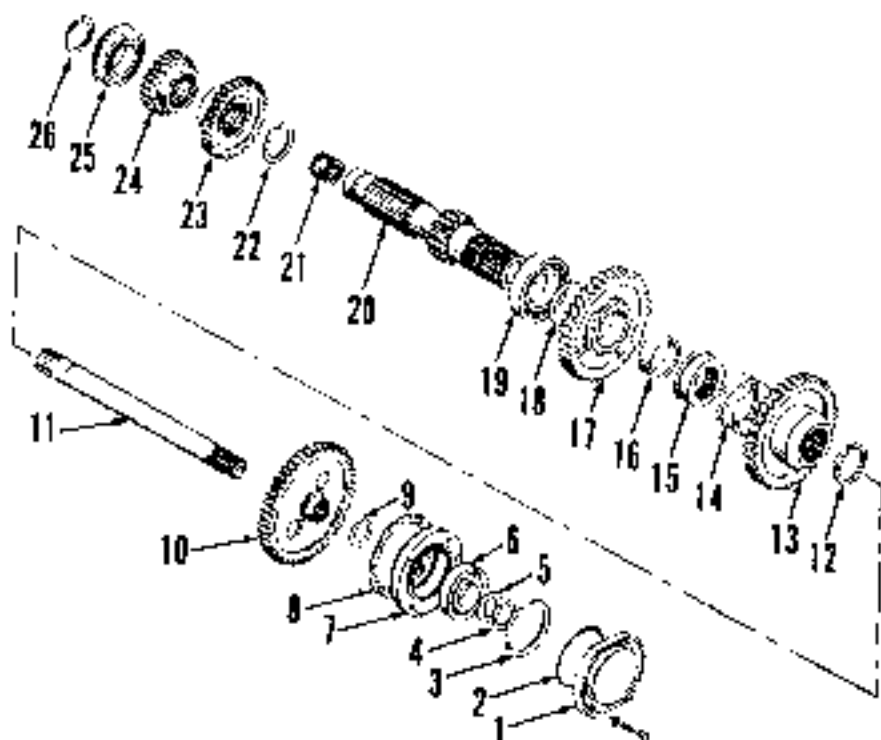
Exploded view of lower pto shaft and transmission countershaft with associated parts used in Multi-Power transmission.
